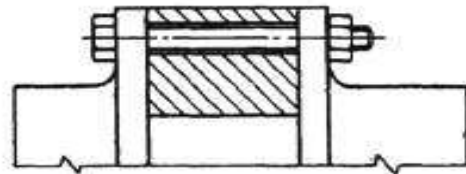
Butterfly Valve, Single Flange Wafer Type
